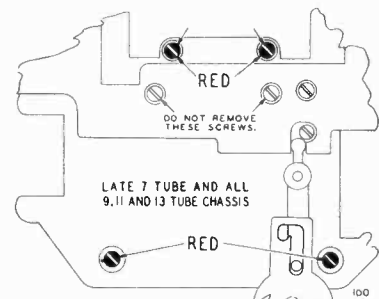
Location of 4 Red Mounting Screws in Late Models
